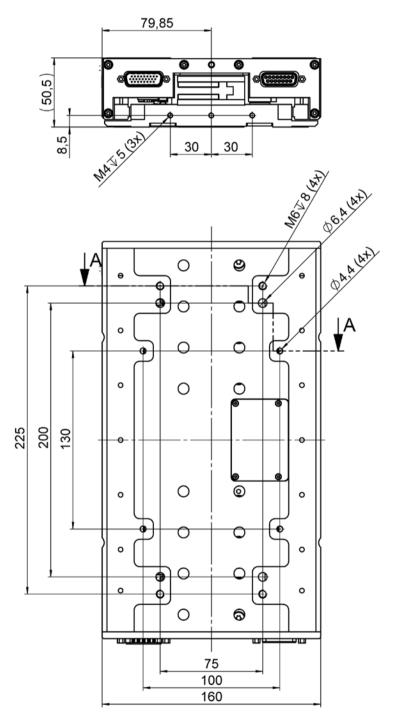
Dimensions of the V-551.4D: Side view and bottom side
